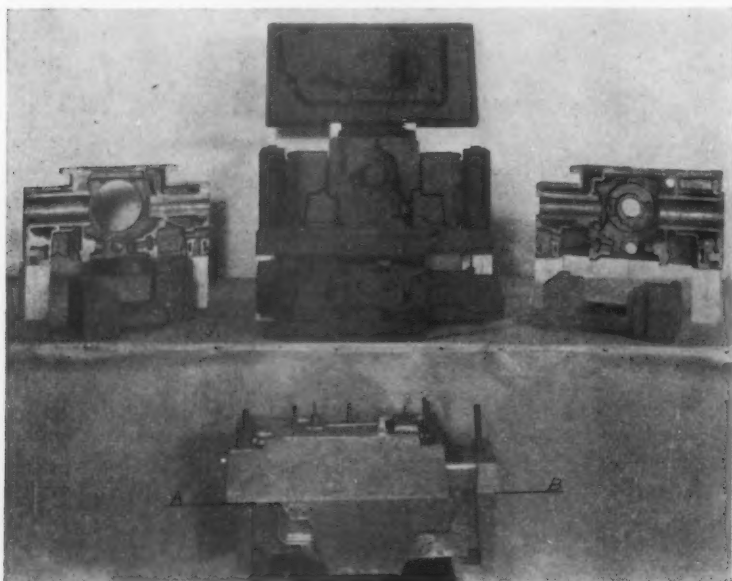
TWO CYLINDER HORIZONTAL STARTING ENGINE. A-B VIEW SHOWS PATTERN AS USED ORIGINALLY. UPPER VIEW SHOWS ASSEMBLY AND CASTING AFTER PATTERN WAS REDESIGNED.
